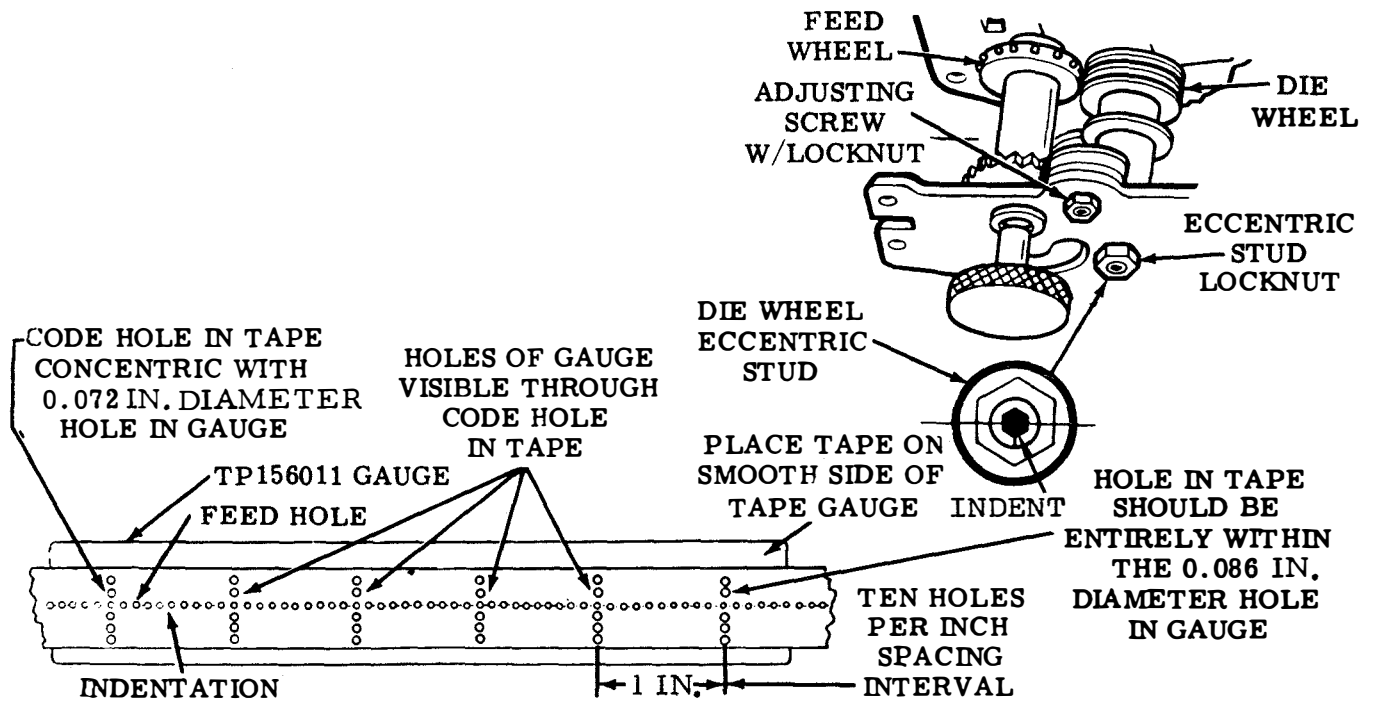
Feed Hole Spacing (Final) (Fully Perforated Tape With Indentations of Feed Wheel Between Feed Holes)
